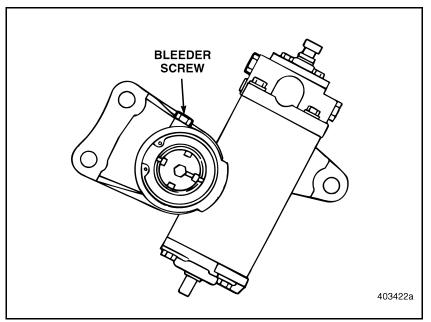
Sheppard M90 Steering Gear Bleeder Screw Location
